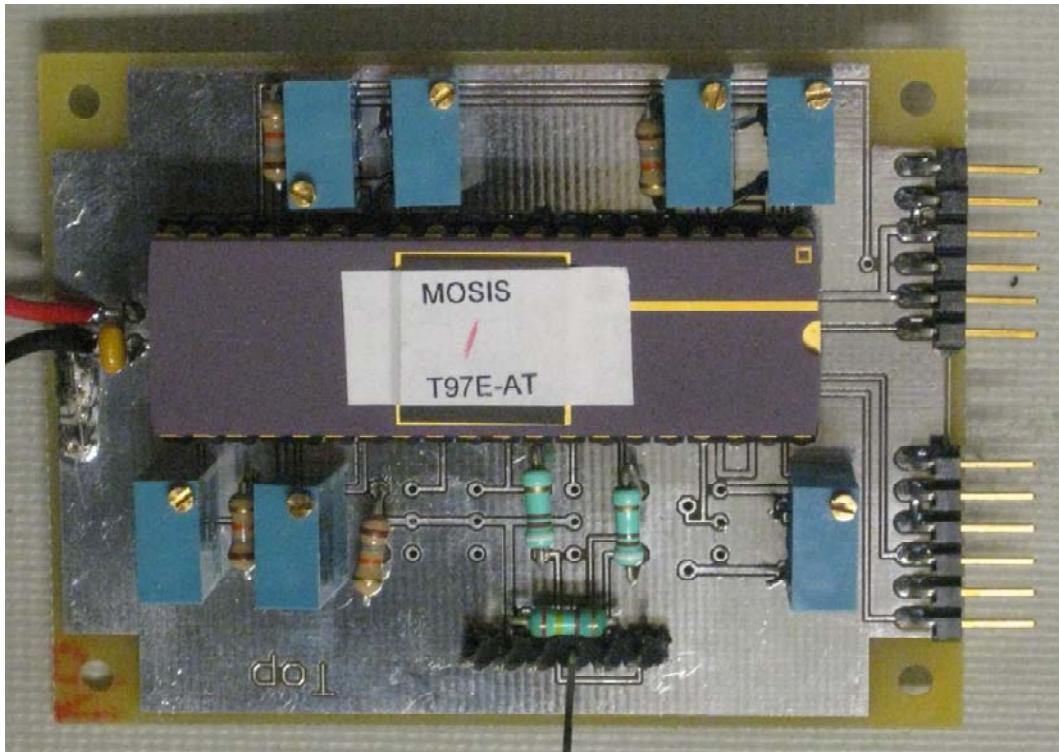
Photo of completed test PCB. The headers on the right and on the bottom are used to connect to the FPGA board, while the blue variable resistors are used to create the necessary bias voltages.
